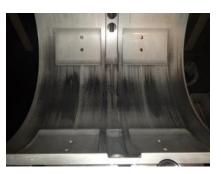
UEC50LSH-Eco-C2 Crosshead pin bearing metal condition (13,663 running hours)
